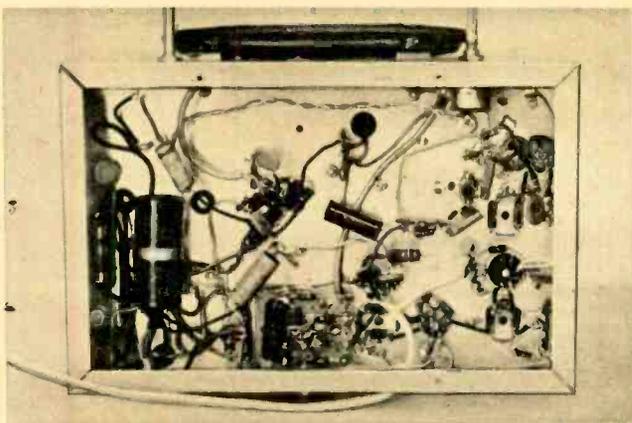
Underside of receiver. The 5 x 7-in. oval speaker (top) is mounted on chassis with small angle brackets but it could be attached to cabinets.
